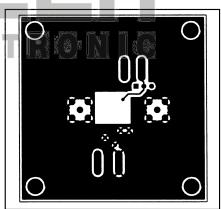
SO-8 High-Speed EV Board Layout—Solder Side
